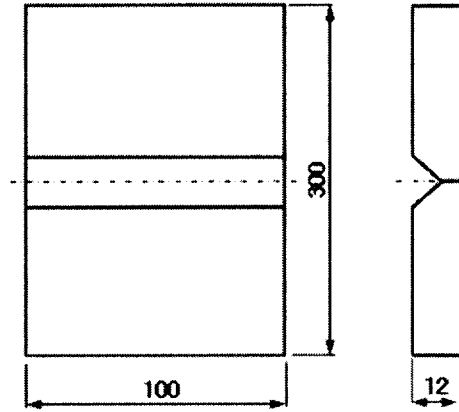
Specimen of Y-groove butt joint for plasma keyhole welding
